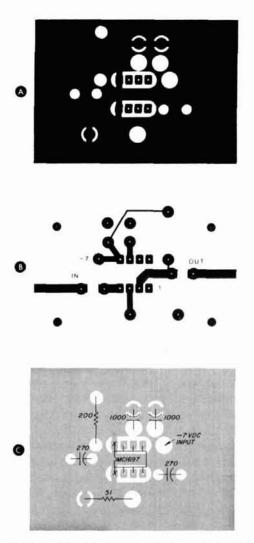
The top and bottom sides of the printed circuit board are shown in A and B respectively. In the parts placement diagram, C, C1, and C2 are installed on the top of the board if glass or mica capacitors are used; if chip ceramics are used, they are mounted on the foil side. The leads marked with an X are to be soldered on the ground plane side.
